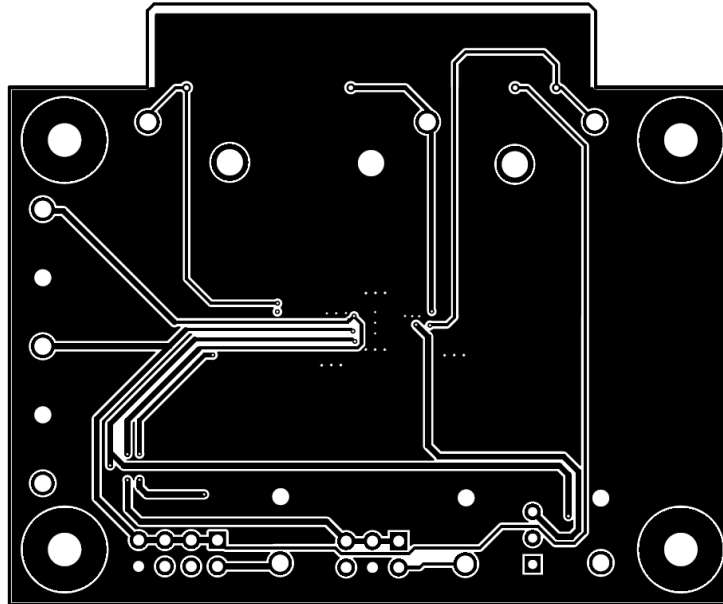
Fixed Output Board Layout - Mid Layer 2 (above bottom layer) Copper
